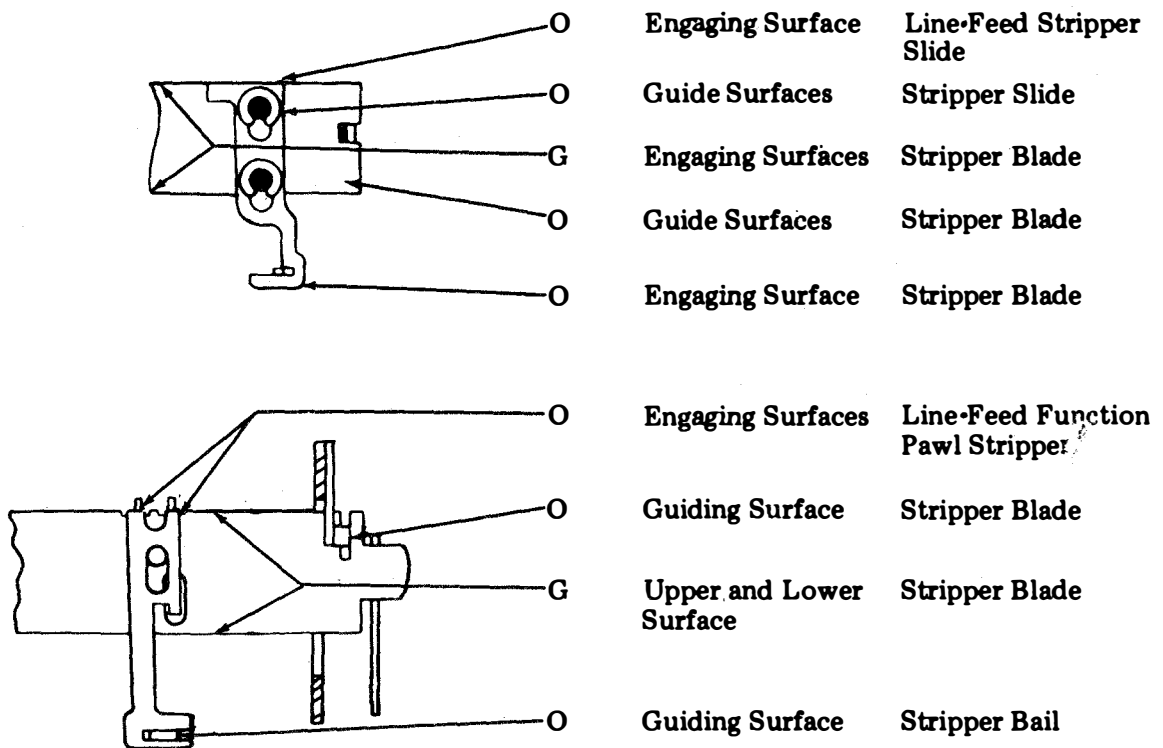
Stripper Blade Mechanism, (Late Design), Rear View
